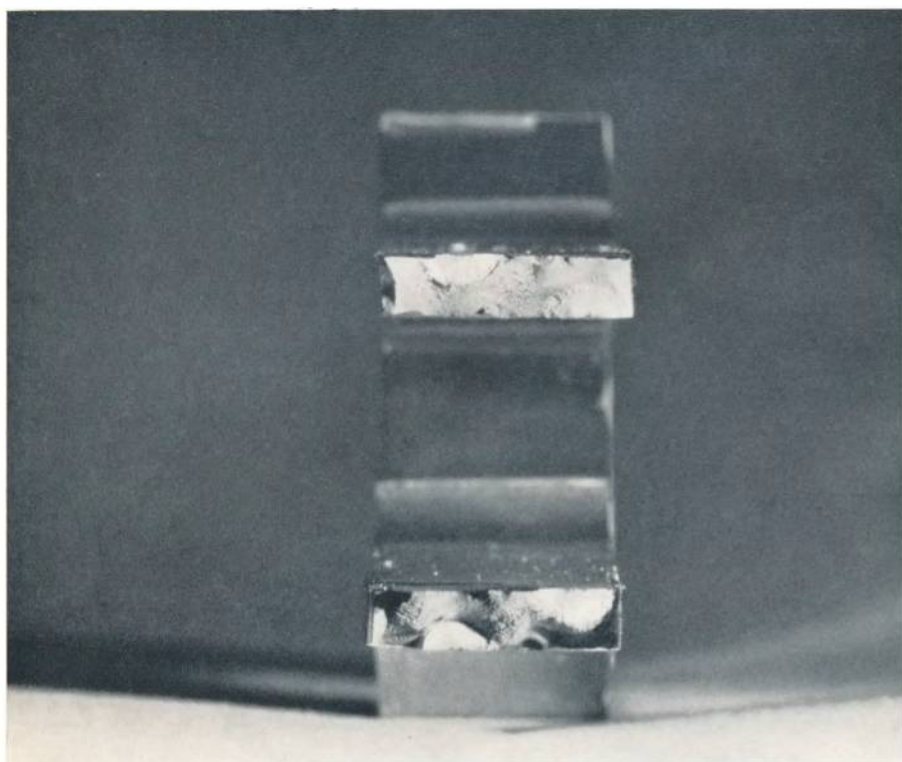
Cross Section View Showing Fatigue Failure of Specimen from Test With Fretting
